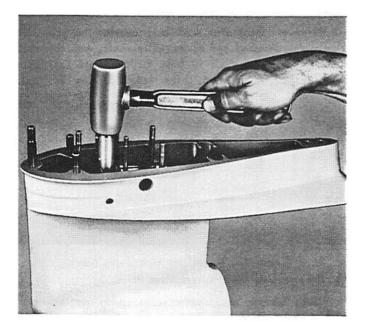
Removing Drive Shaft Needle Bearing from Gear Housing
